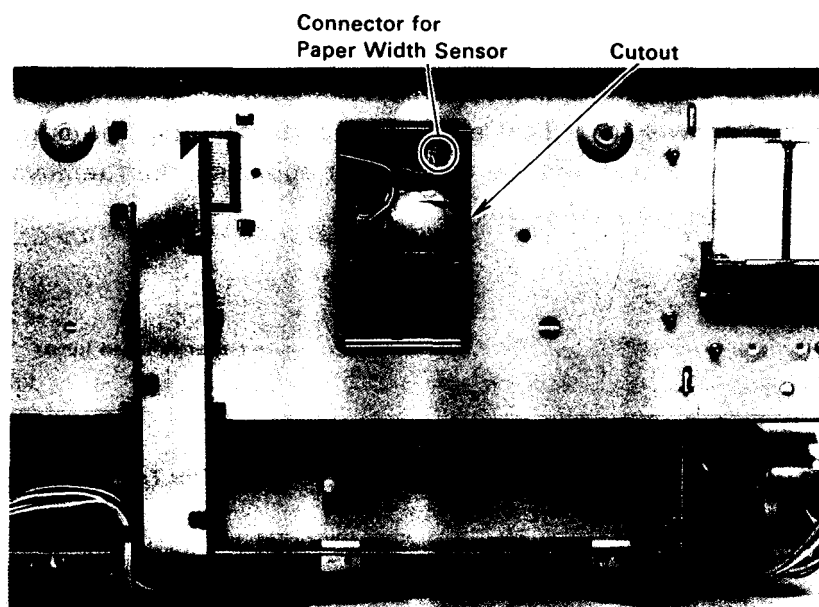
Paper Width Sensor Connector Removal (Back of Carriage)
